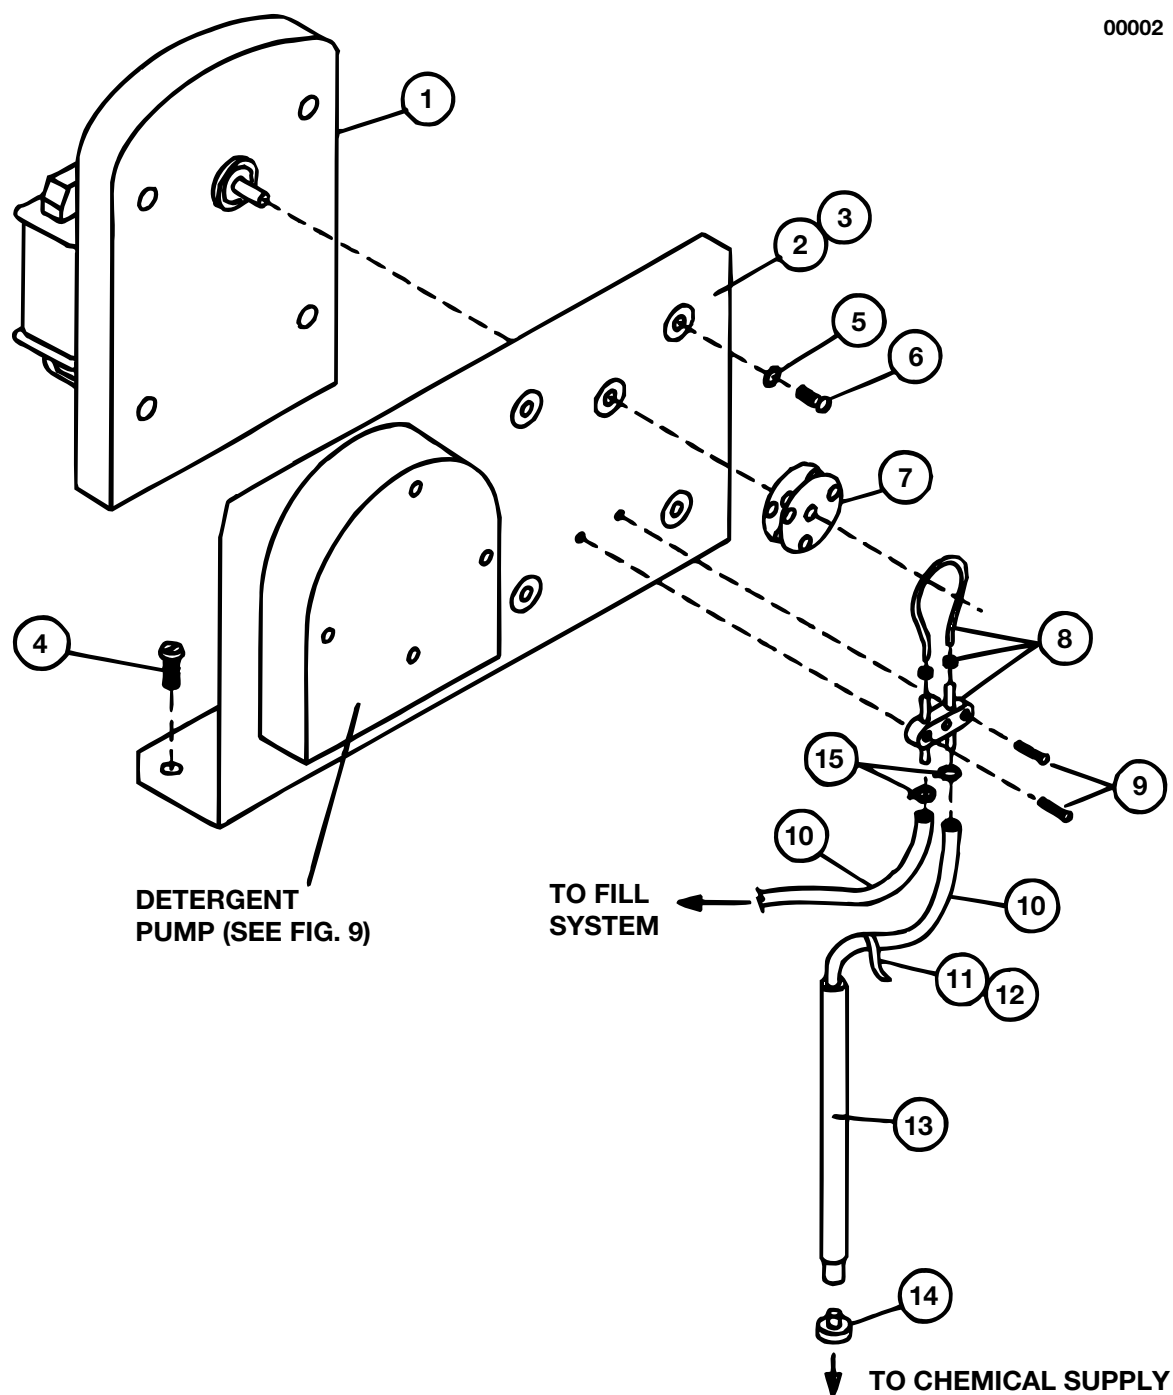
Sanitizer/Rinse Aid Pump Assembly
